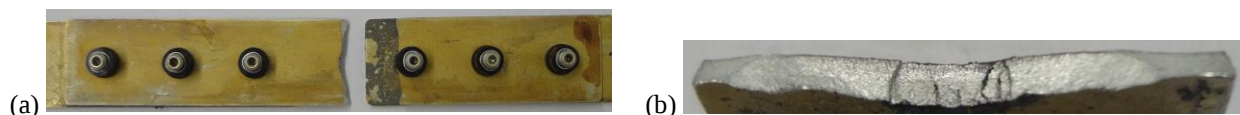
Specimen IB-19 (120 MPa): (a) fracture SP-NC; (b) fractured cross-section
